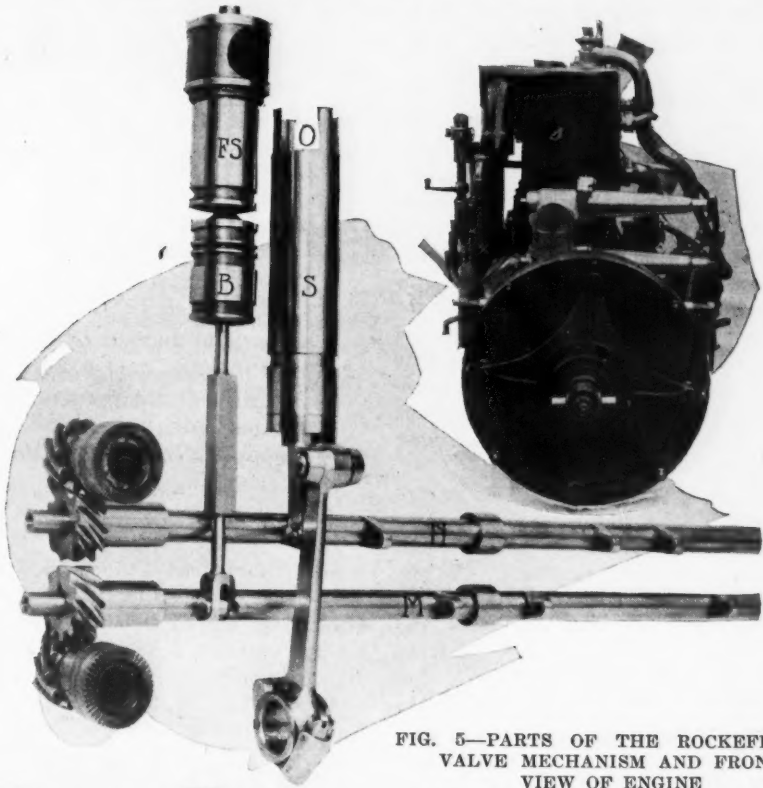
PARTS OF THE ROCKEFELLER VALVE MECHANISM AND FRONT VIEW OF ENGINE
